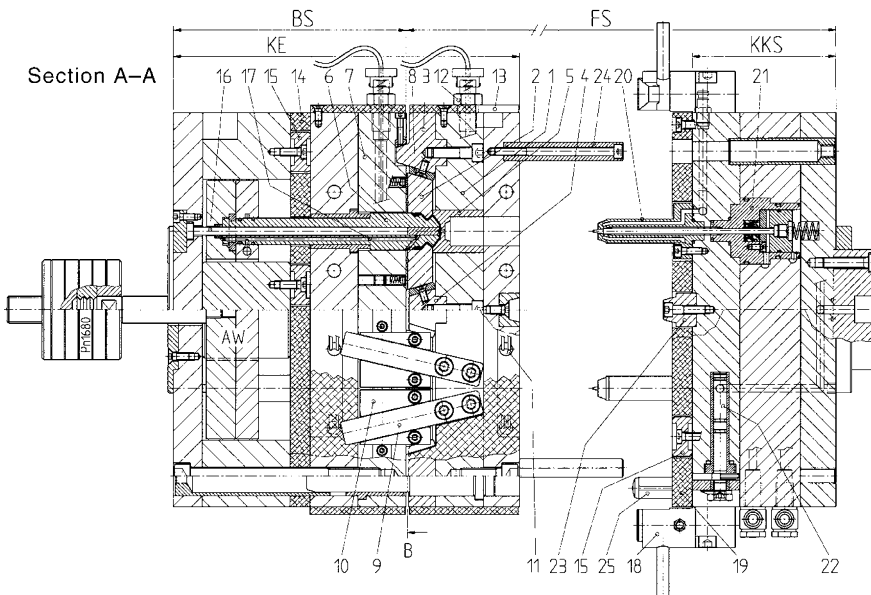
16-Cavity injection mold with cold-runner system for LSR caps
